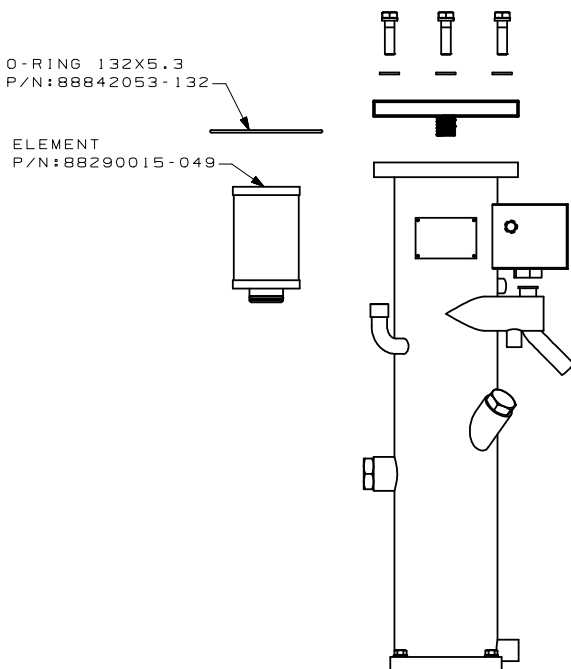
The Air/Oil Separator System Of WS0400, WS0500, WS0700 Unit
